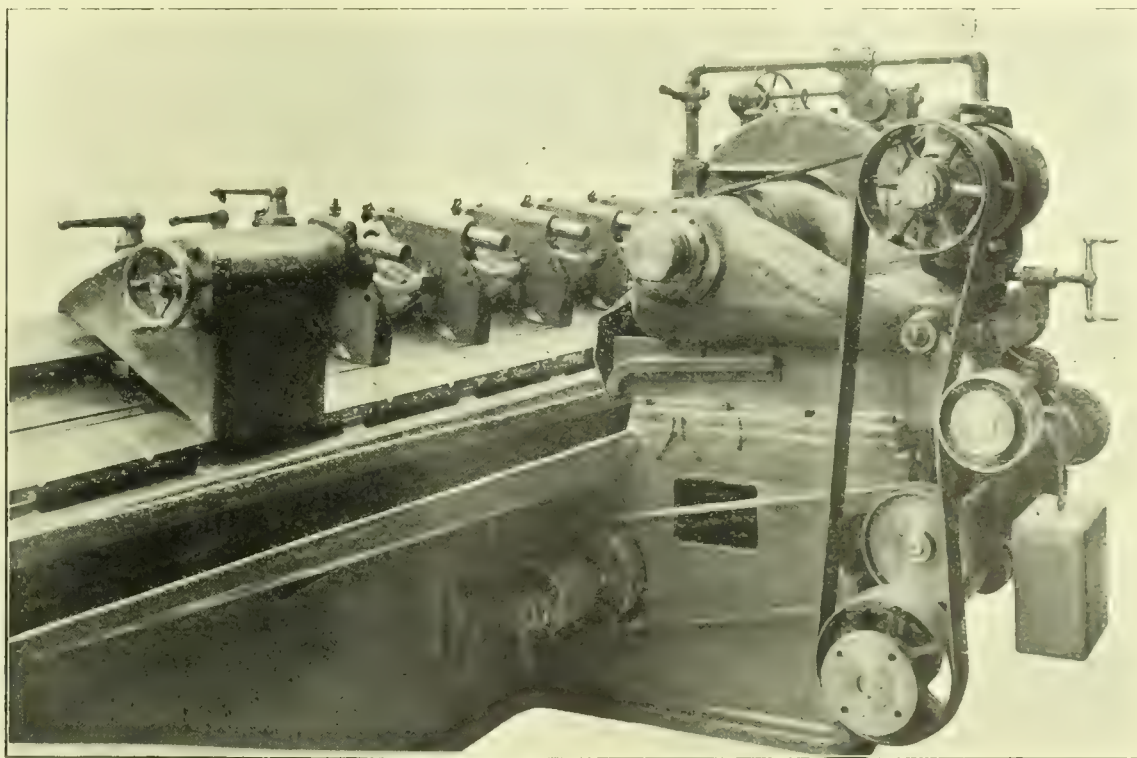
HEAVY CYLINDRICAL GRINDING MACHINE.
